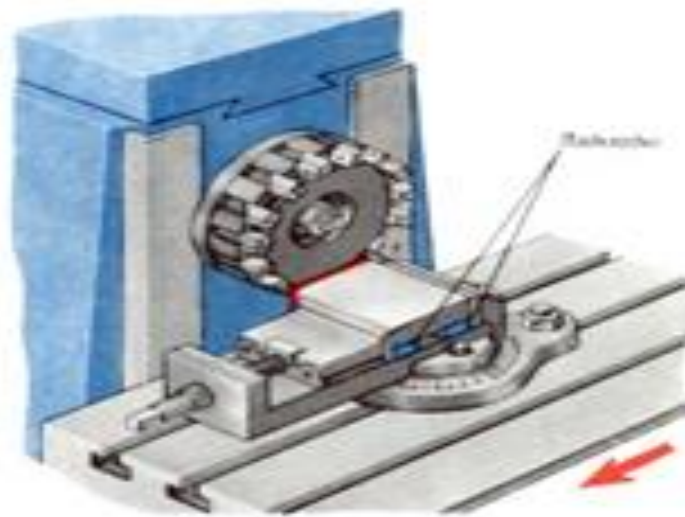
Milling with a face mill on a horizontal milling machine
